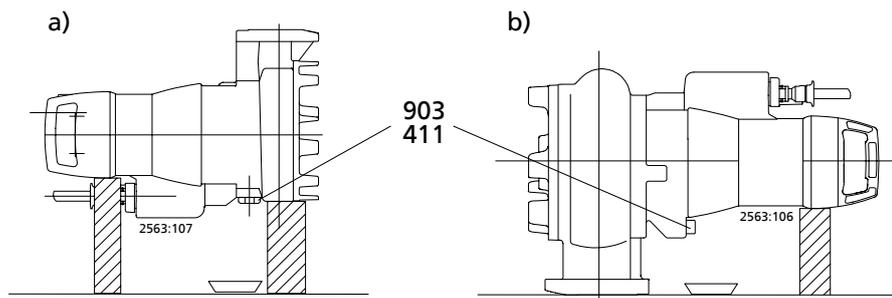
Draining the lubricant a) Versions YL & WL for sizes 50-170, 50-172 and 65-220; b) Versions YL & WL
